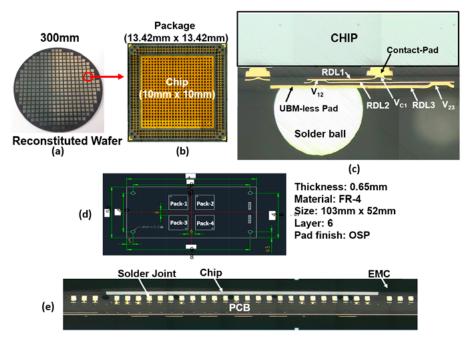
Fan-out package with lead-free solder joints on a PCB.
